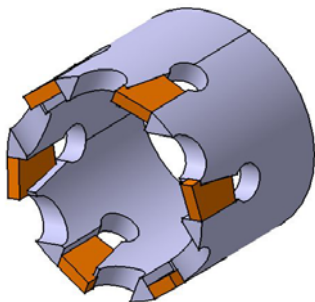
Reamer with inserts clamped by the elasticity of the tool body on the frontal face.
